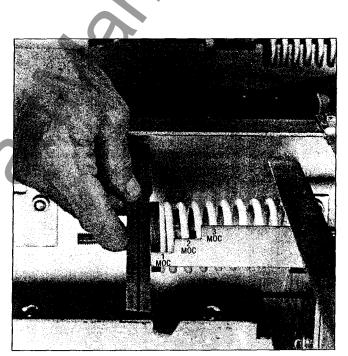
Checking Drive Spring for Proper Adjustment for One Installed MOC Switch
